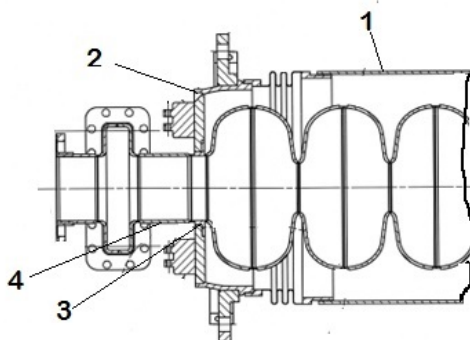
Scheme of combined adapter connection with a cryogenic module: 1 – steel shell; 2 - electron beam welding or argon arc welding connection of shell with steel flange of adapter; 3 - steel flange; 4 - niobium tube.
